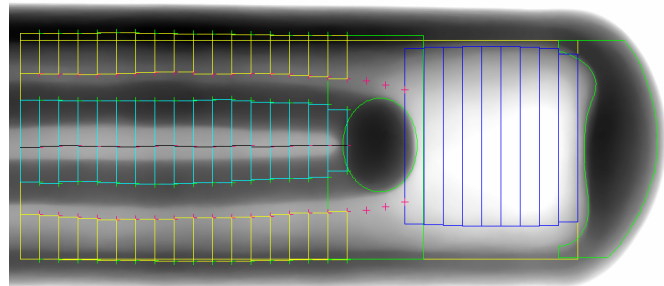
Inspection of the sensor tip. Among other things, distances, thicknesses, and the welding of two wires are checked. (source: GÖPEL electronic)
